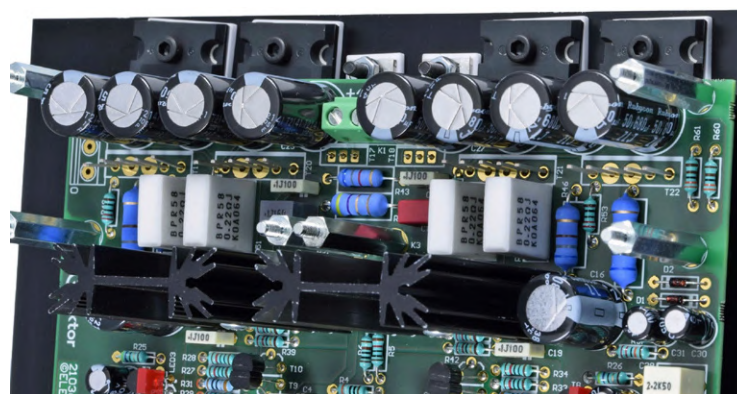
Transistors T17 – T22 temporarily mounted on the heat sink with ceramic pads. After provisional fitting of the circuit board, the leads of T17 – T22 are soldered on the top side of the board.
